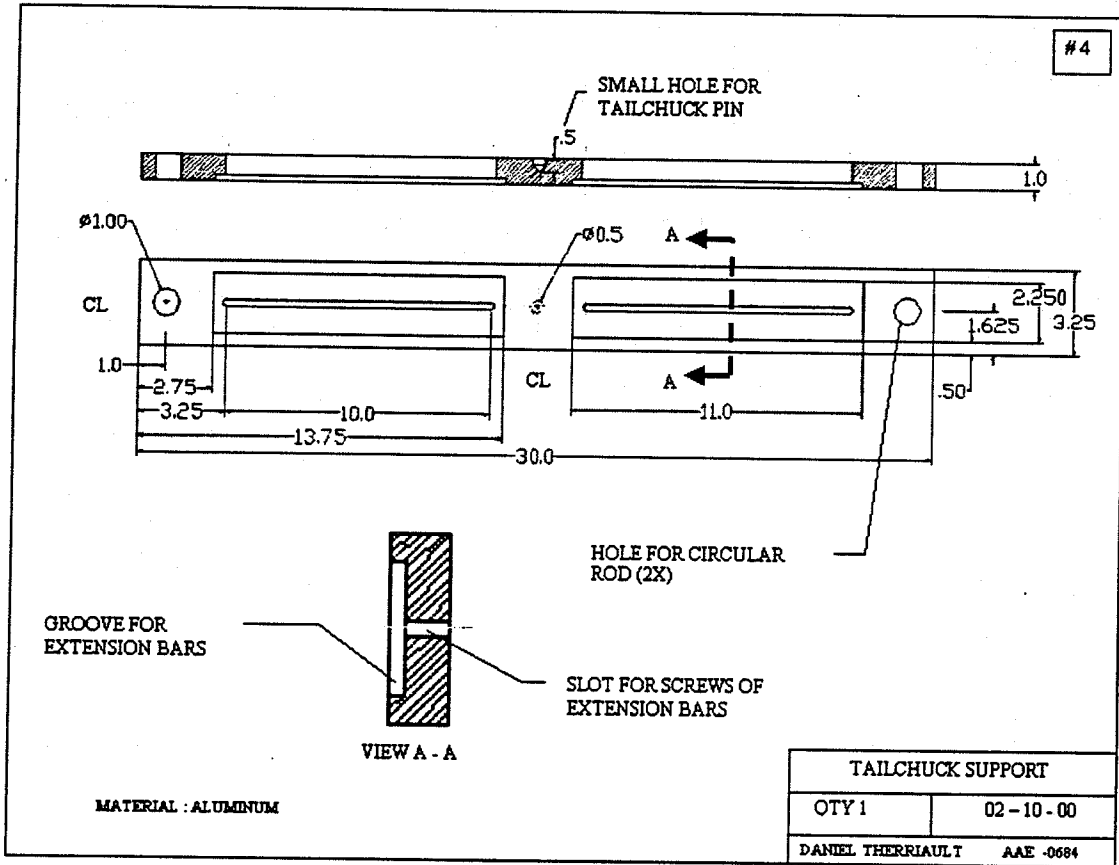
Engineering drawing of the aluminum bar used in the outer shell support tooling
